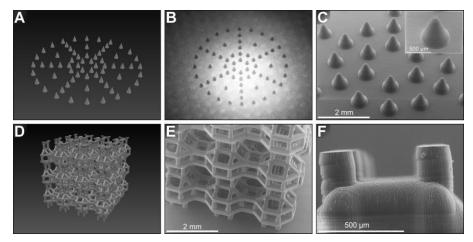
CAD designs and SEM micrographs of exemplary 3D prints. A) CAD design of first exemplary structure. B) Photograph of 3D print on release layer. C) SEM micrograph of 3D printed structures on release layer. D) CAD design of second exemplary structure. E) SEM micrograph of 3D print on release layer. F) Close-up of released structure. The protrusions have been standing on the release layer.
